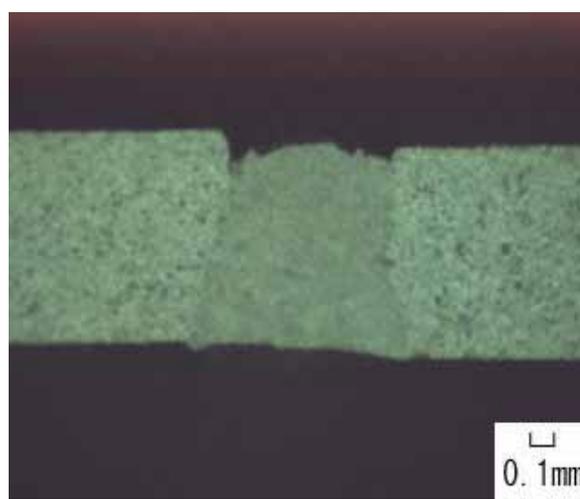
Macro structure of Disk laser butt weld zone.
